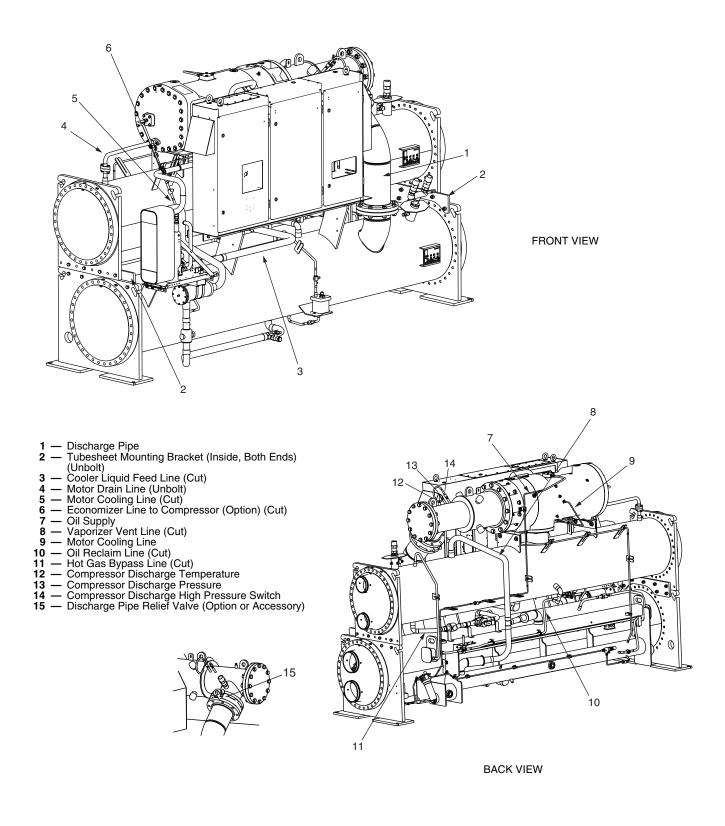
Cooler/Discharge Pipe Assembly Removal (Unit with P Compressor Shown)
